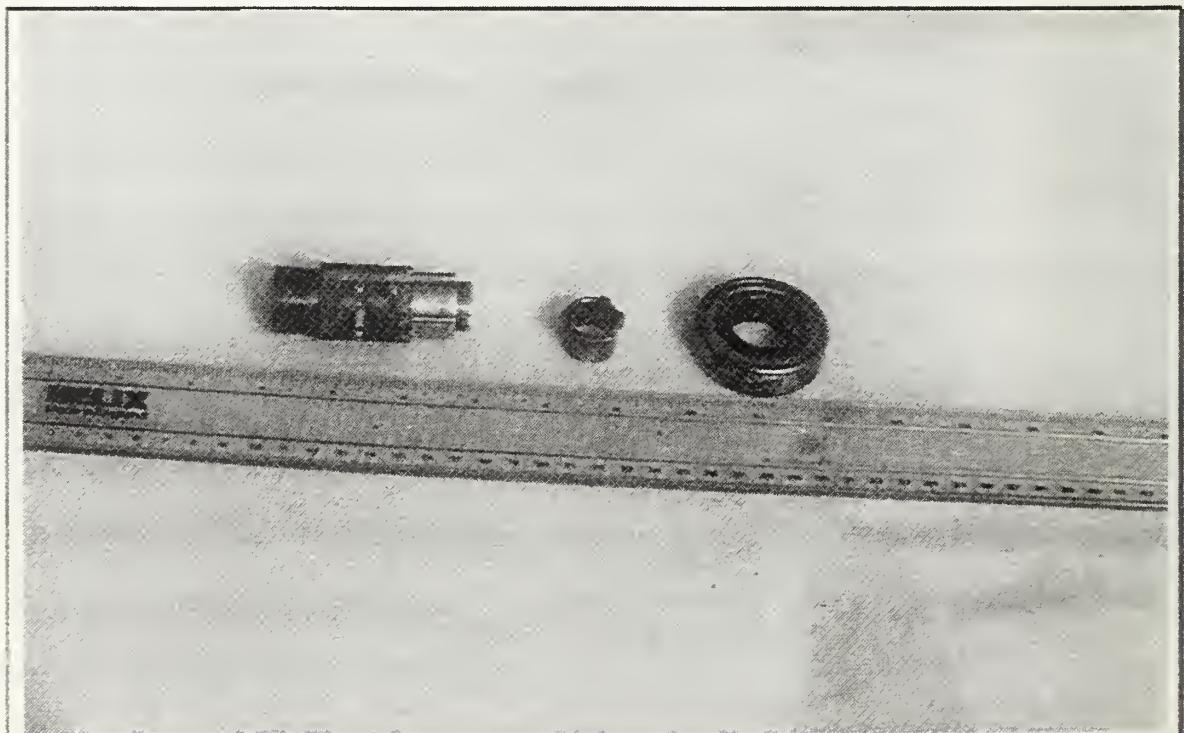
Damaged Bearing and Brass Bushing, and Scorched Shaft
